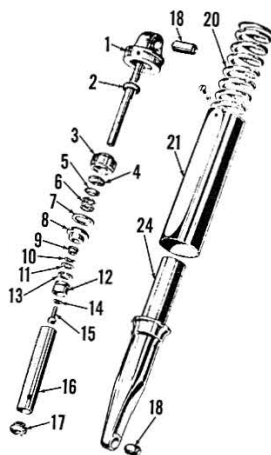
Exploded view of rear suspension unit typical of Sport 60, Saber and Cheyenne.
